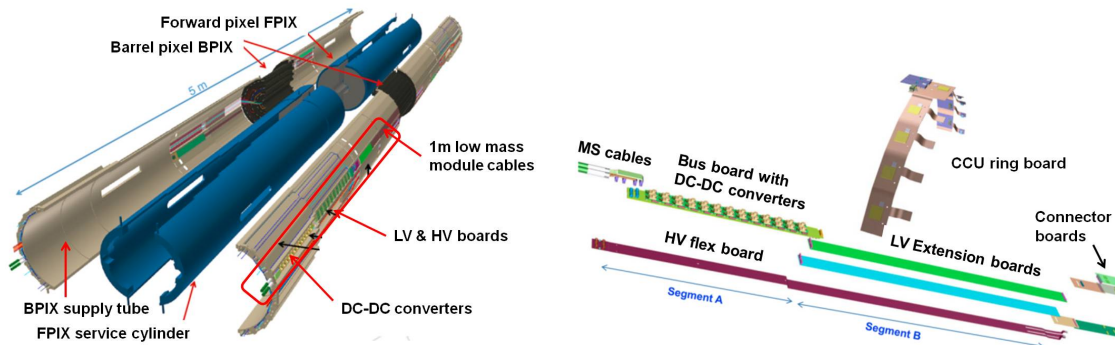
CAD drawing of the pixel detector including support structures, with one slot of the supply tube equipped with electronics components (left); and exploded view of the power electronics in segments A and B of the supply tube (right).
